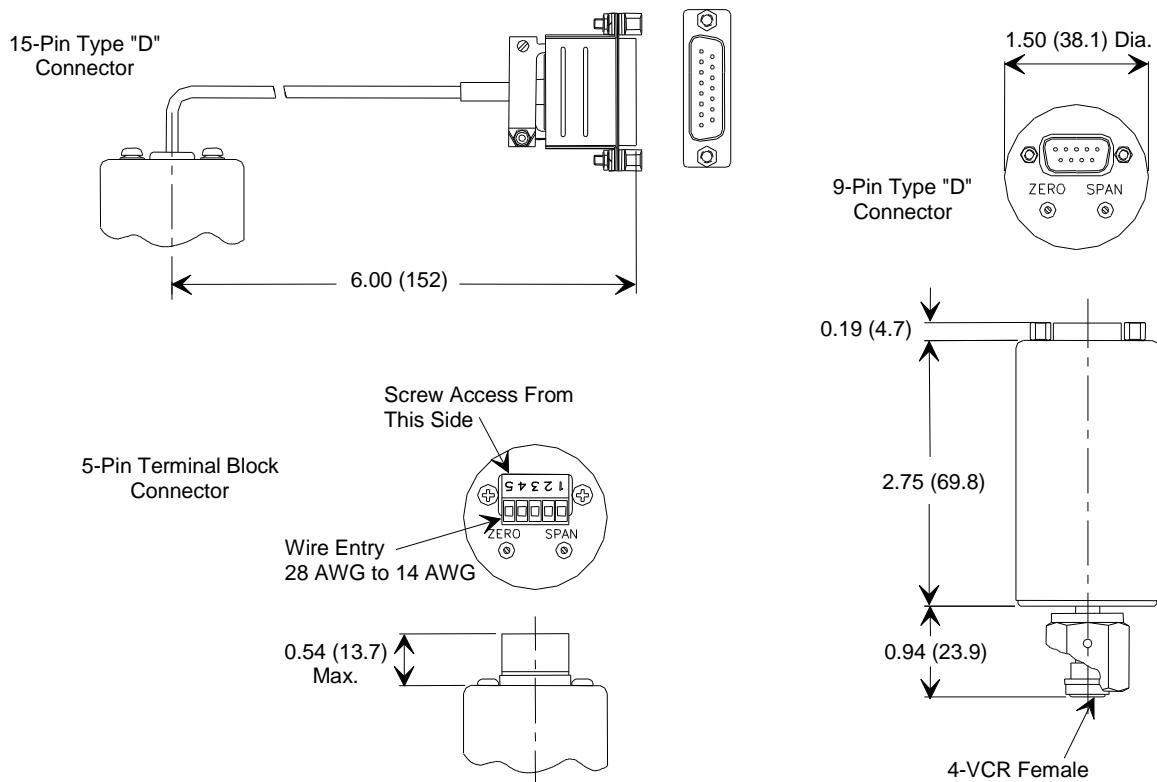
Dimensions of the Low Pressure (up to 1000 Torr) Type 722C Transducer
